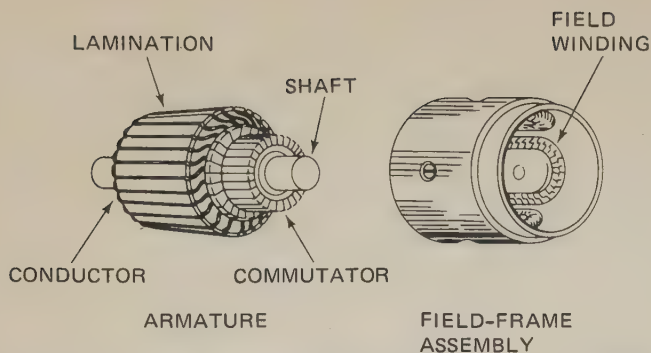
The generator armature and field-frame assembly. (Delco-Remy Division of General Motors Corporation)
